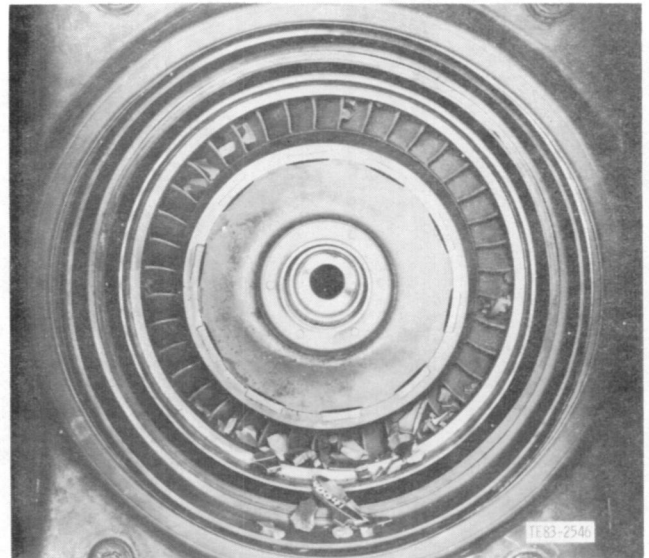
Inlet view, power turbine nozzle assembly for engine C-4, TD14.
